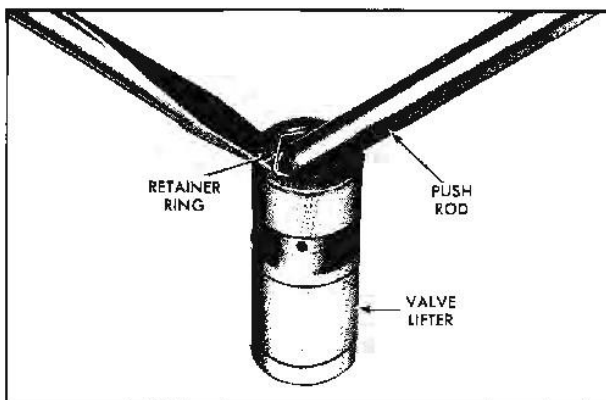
Removing Push Rod Seat Retainer Ring
